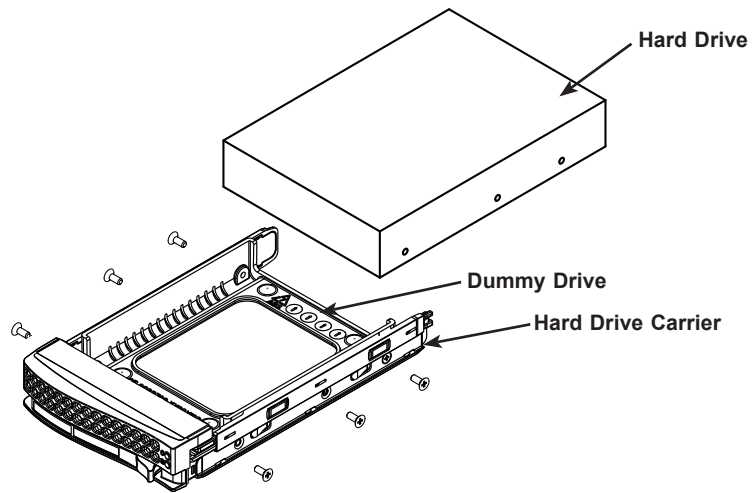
Installing a Hard Drive into a Drive Carrier
